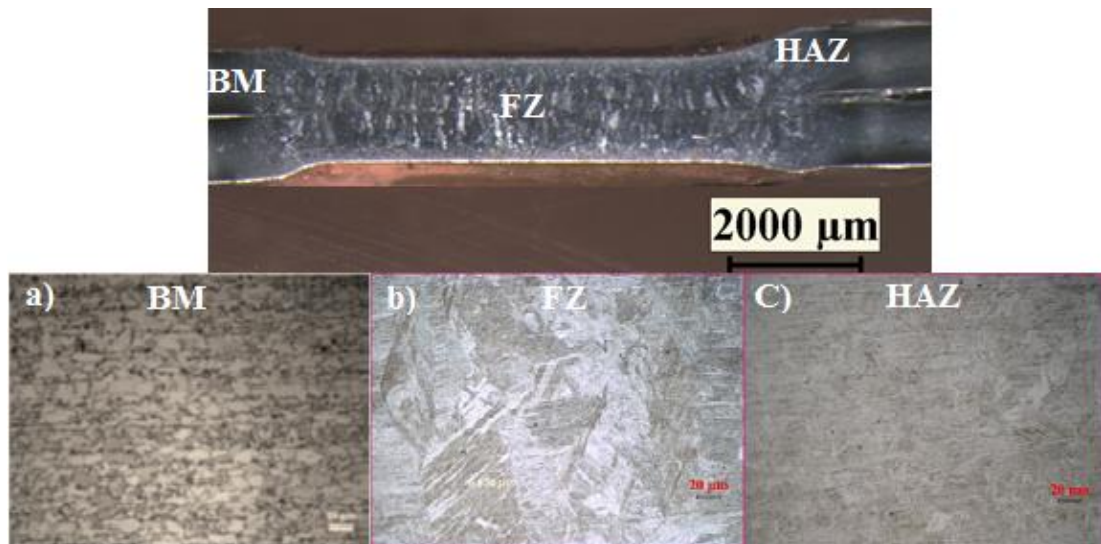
The microstructure of weldment joined with 3.5 Bar electrode force with 8kA welding current. a) DP600 base metal (BM), b) DP600 Heat Affect Zone (HAZ), c) DP600 weld nugget (FZ). parameters of (3.5 Bar – 8 kA).
